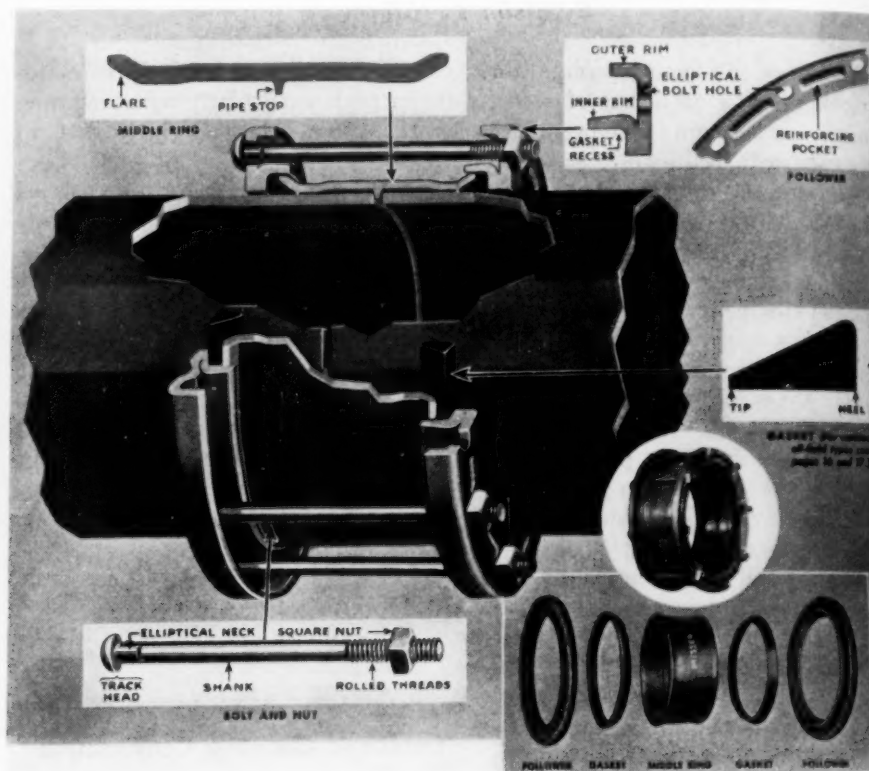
Component Parts and Typical Cross-Section of the Sleeve Type Coupling
